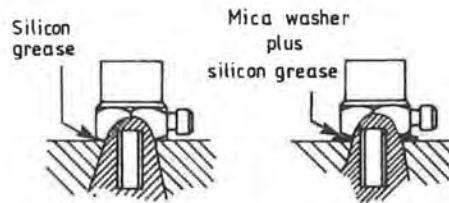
Recommended mounting technique for commercial sensors (courtesy of Bruel and Kjaer).
